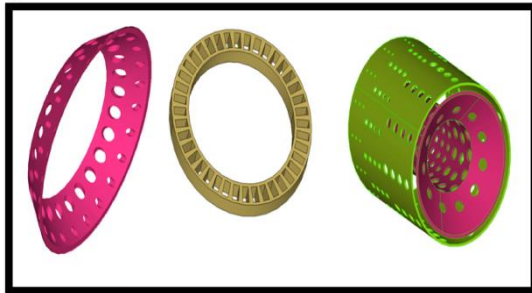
CAD Detail of Micro Gas Turbine Combustor Component.
